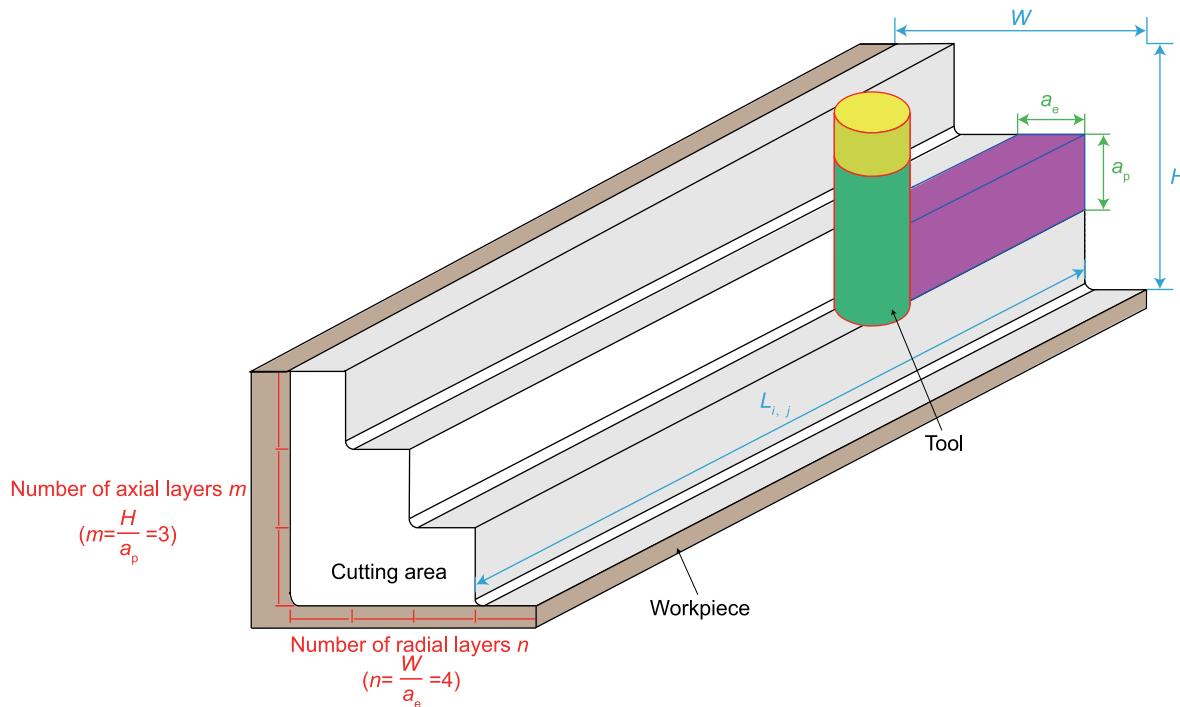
The diagram of workpiece with m axial cutting layers and n radial cutting layers.
